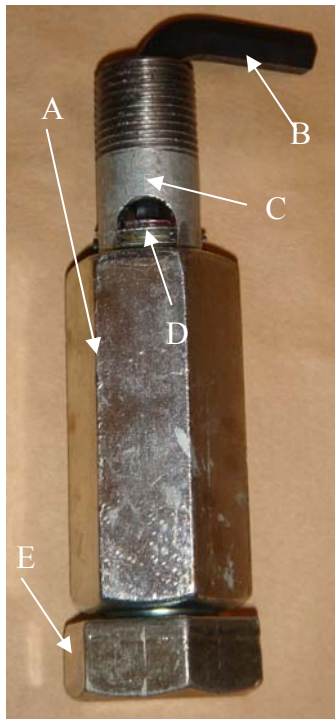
Side view of our metal mold (A), with driver shaft (allen wrench, B), alginate pocket plug (C), three-slot screw cap (D), and bolt base (E).
